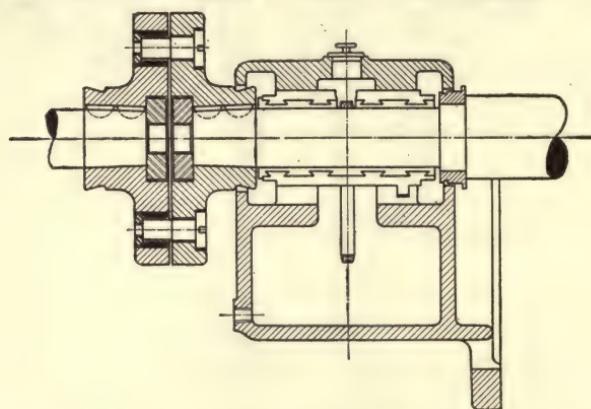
Outboard bearing bracket for DeLaval Class C turbine.
